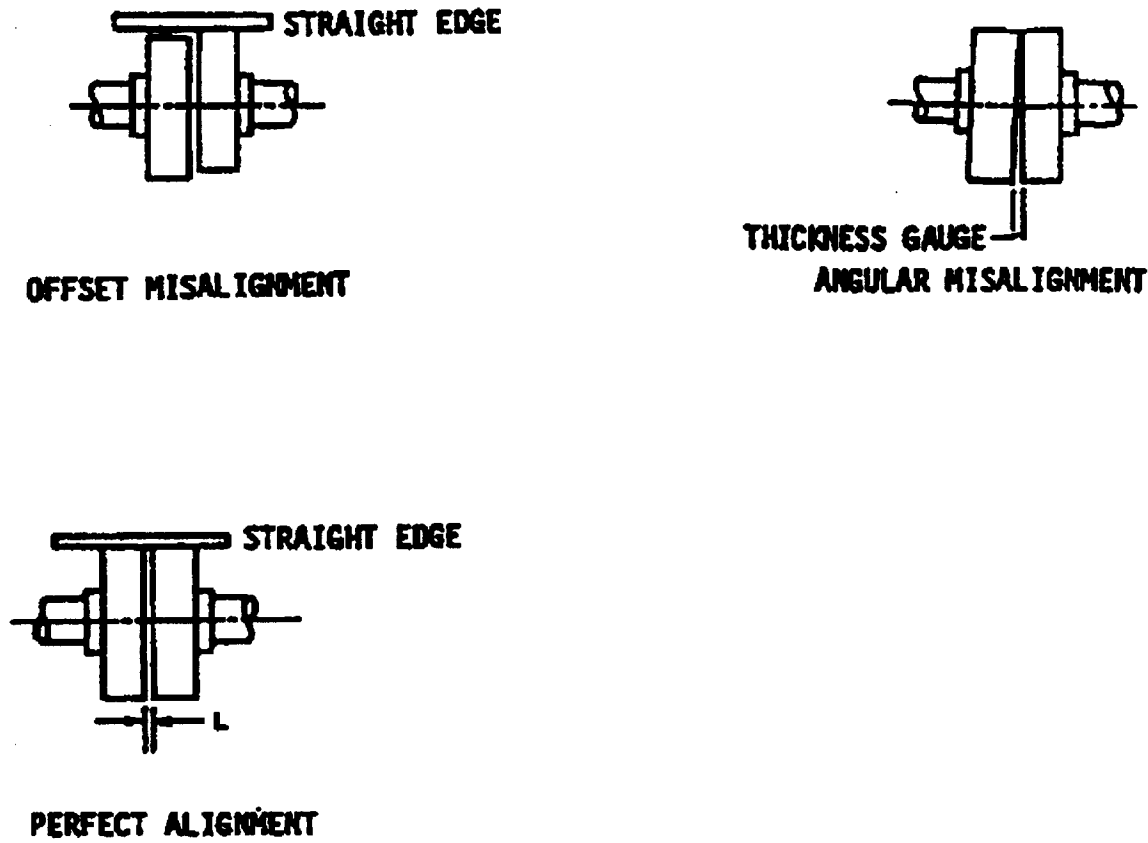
Straight Edge and Thickness Gauge Method
